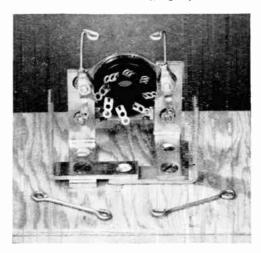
First steps in assembly, showing the manner in which the angle pieces are fastened to the baseboard. Much of the wiring can be done before fastening to the baseboard as described in the text. The pair of looped wires in the foreground show how the crystal-stocket supports are made.
